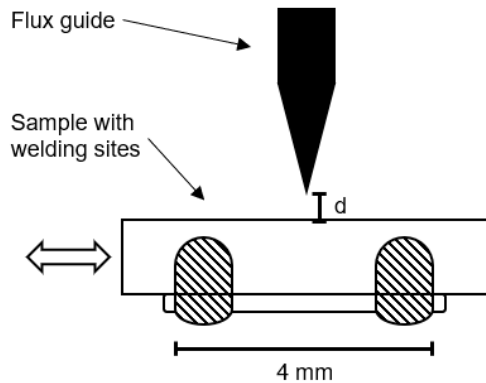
Detailed sketch of the sample with two partial penetration welding seams spaced 4 mm apart. The sample is moved in a distance d along flux guide to measure magnetic stray fields from the bottom side.
